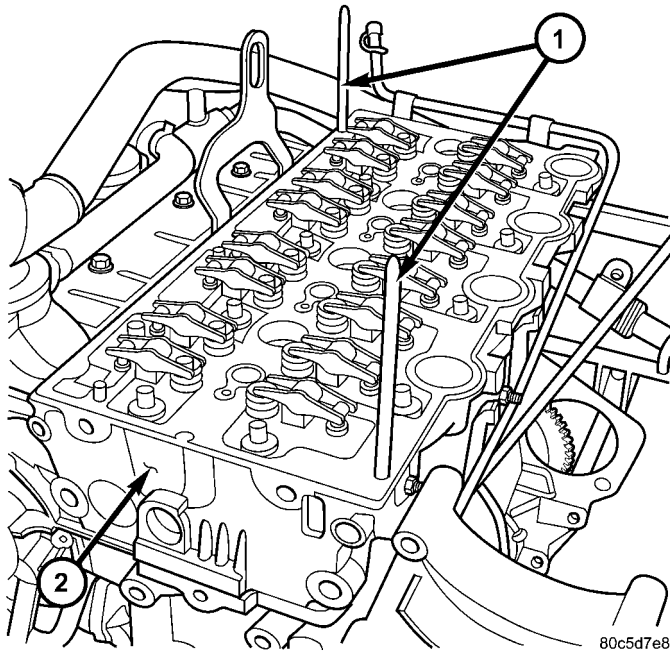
CYLINDER HEAD COVER/INTAKE MANIFOLD ALIGNMENT STUDS VM.1066
